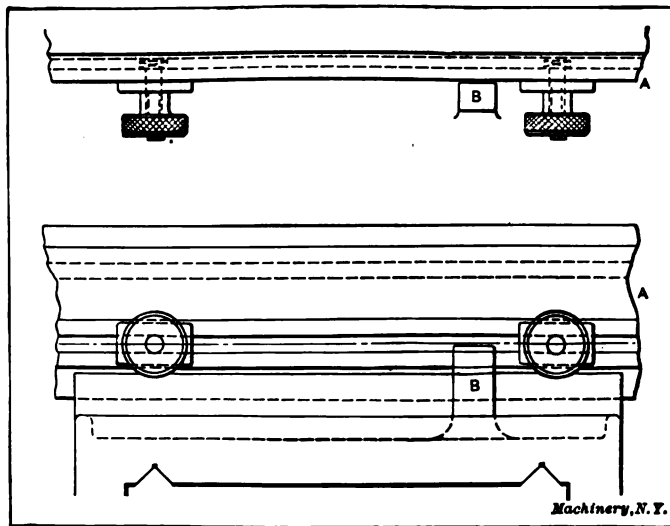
Dead Stops of a Type used on a Cutter-grinding Machine
